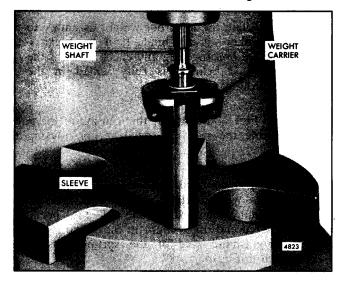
Installing Governor Weight Shaft in Weight Carrier
